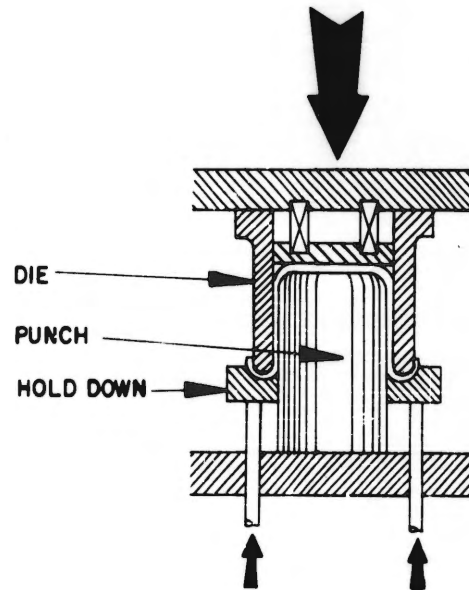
Typical Air Draw (Reverse Redraw) Operation
